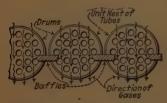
Main steam drum designed for a 10-section Bigelow-Hornsby water-tube boiler.
